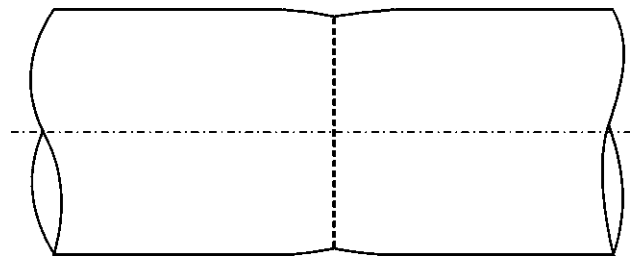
Geometrical imperfection in butt joint zone, caused by making the circumferential weld
